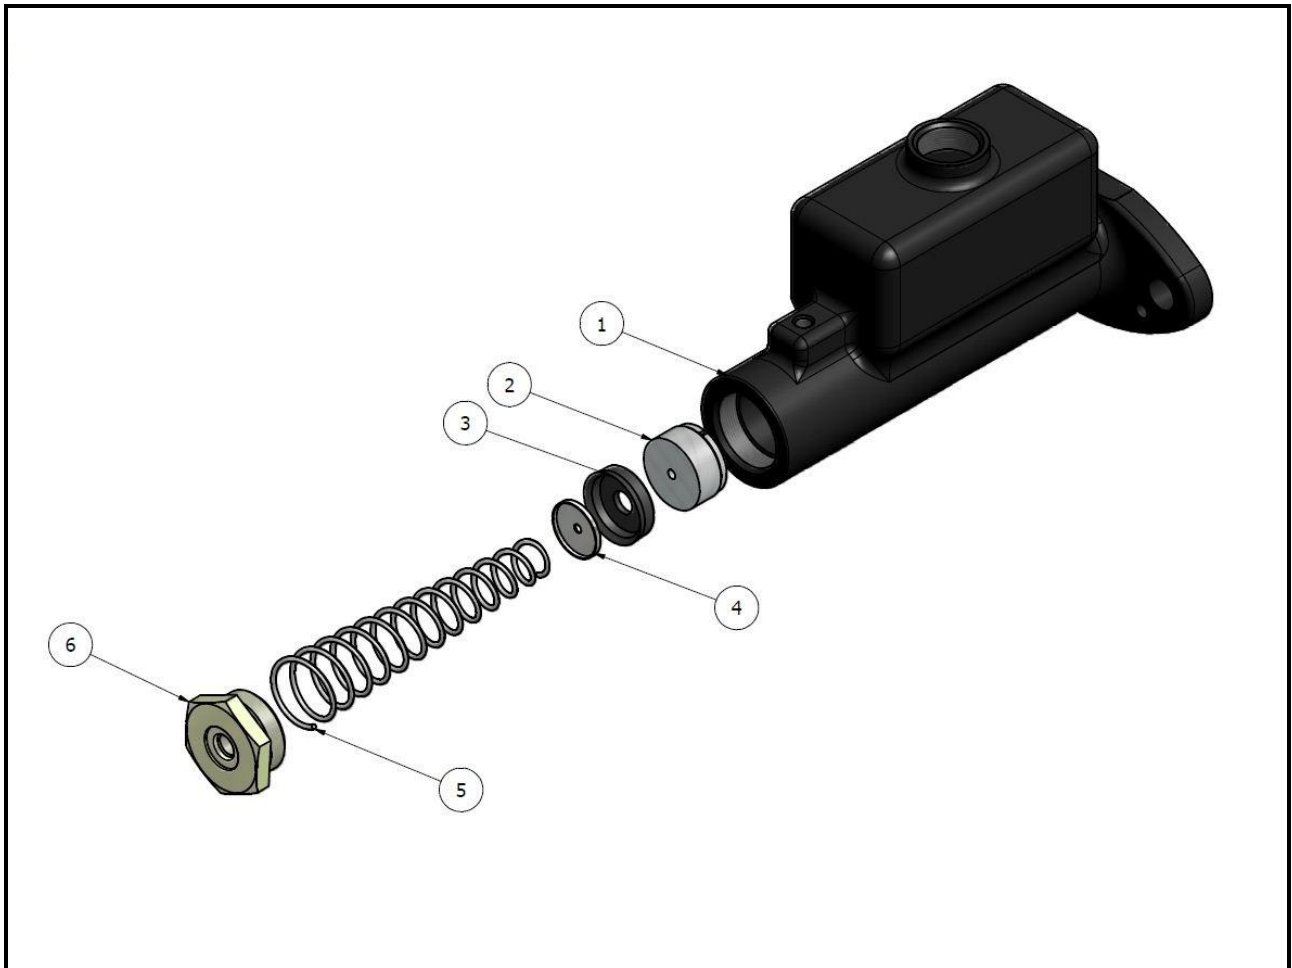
Master Cylinder Assembly GA. Item 3 is the piston cup seal.
